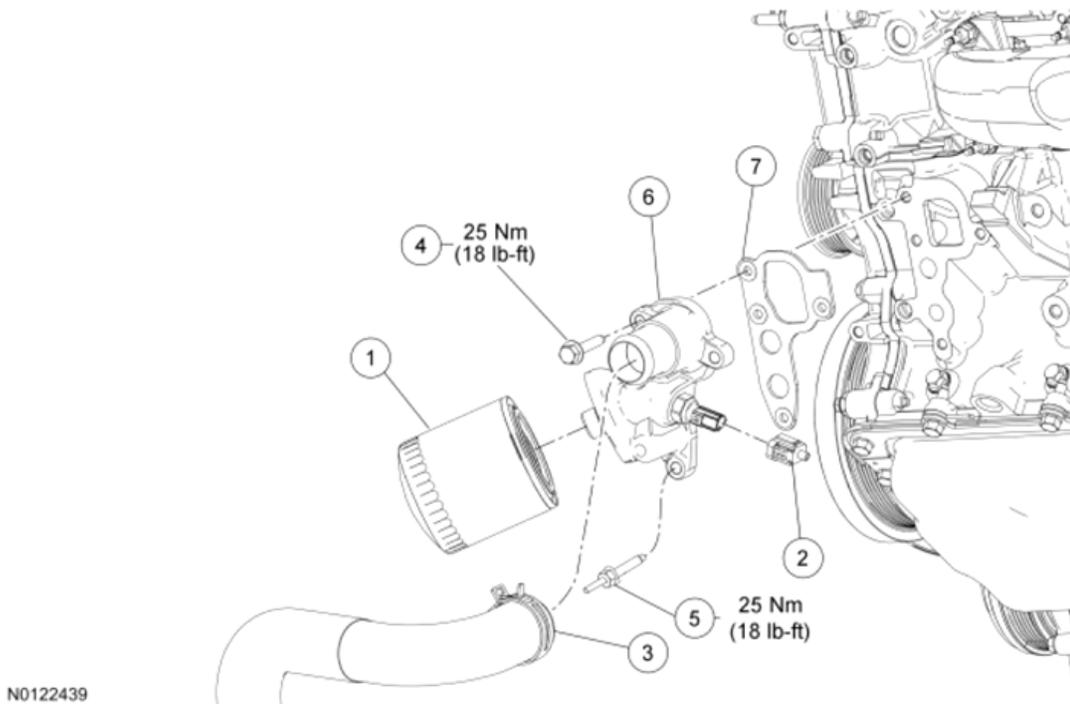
Exploded View Of Oil Filter Adapter With Torque Specification
